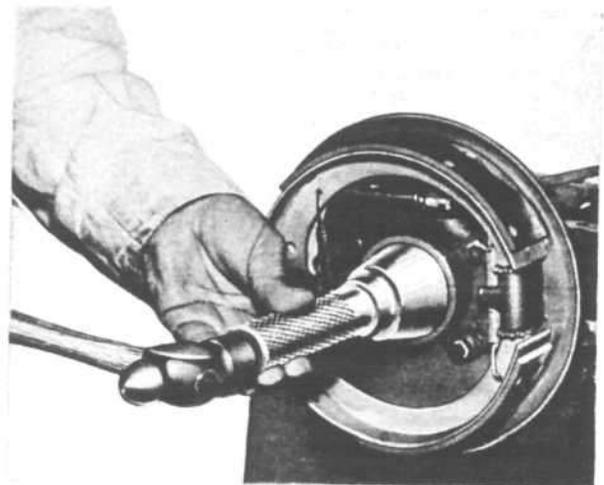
OUTPUT SHAFT OIL SEAL DRIVER
